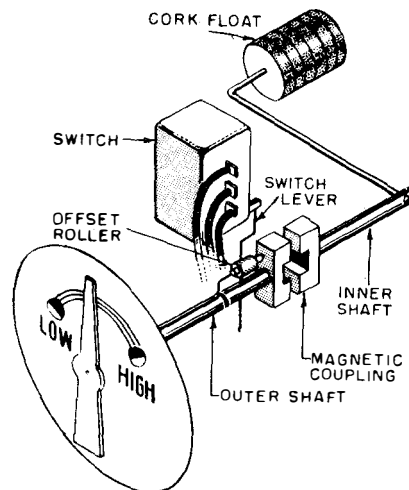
Schematic view of magnetic liquid-level gage with alarm switch
